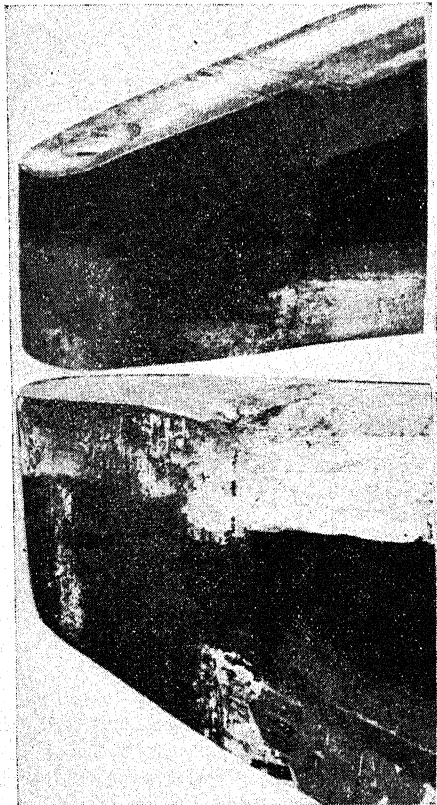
, top, nose piece welded to upper frame and bored; bottom, nose piece welded to lower frame.
